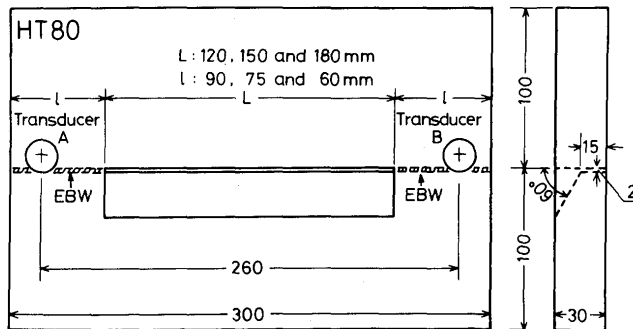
Specimen configuration of restraint cracking test with single bevel groove
